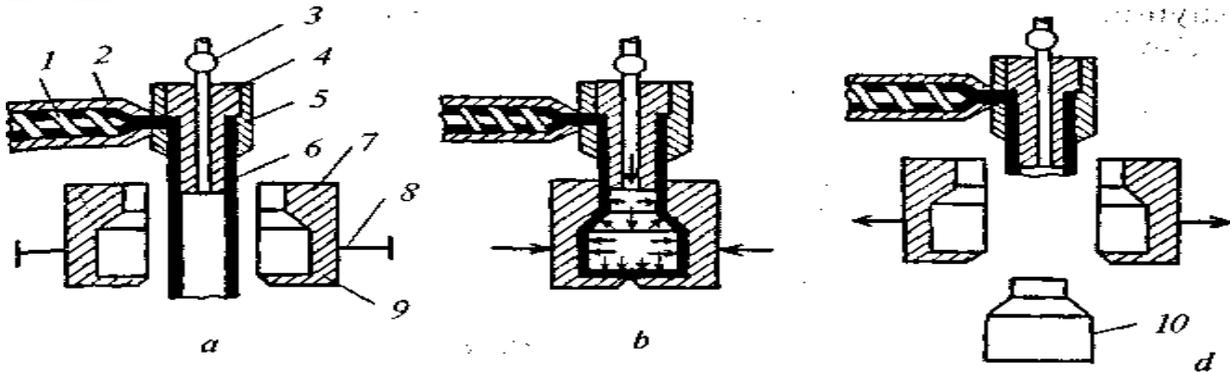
Scheme for obtaining inflatable hollow air containers by extrusion method
